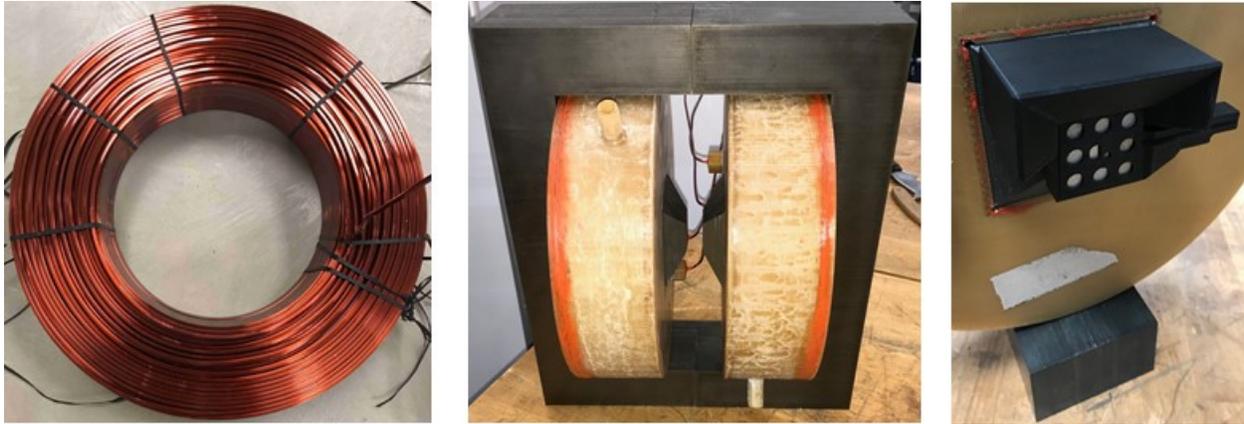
Permanent magnet test fixture subassemblies and components; (Left) One of the two excitation coils after removal from bobbin. (Center) ferromagnetic yoke with excitation coils housed in Ultem oil cooling jackets. (Right) Permanent magnet assembly installed on one half of the magnetic core.
